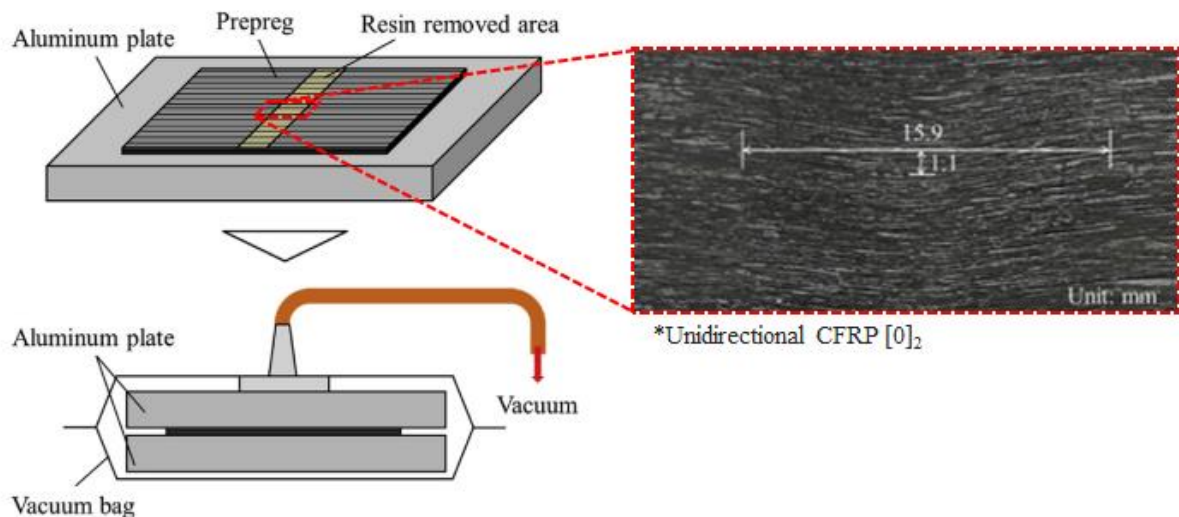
Method used to fabricate a specimen with in-plane FW and photograph of the induced defect (adapted from MIZUKAMI *et al.*, 2016)
